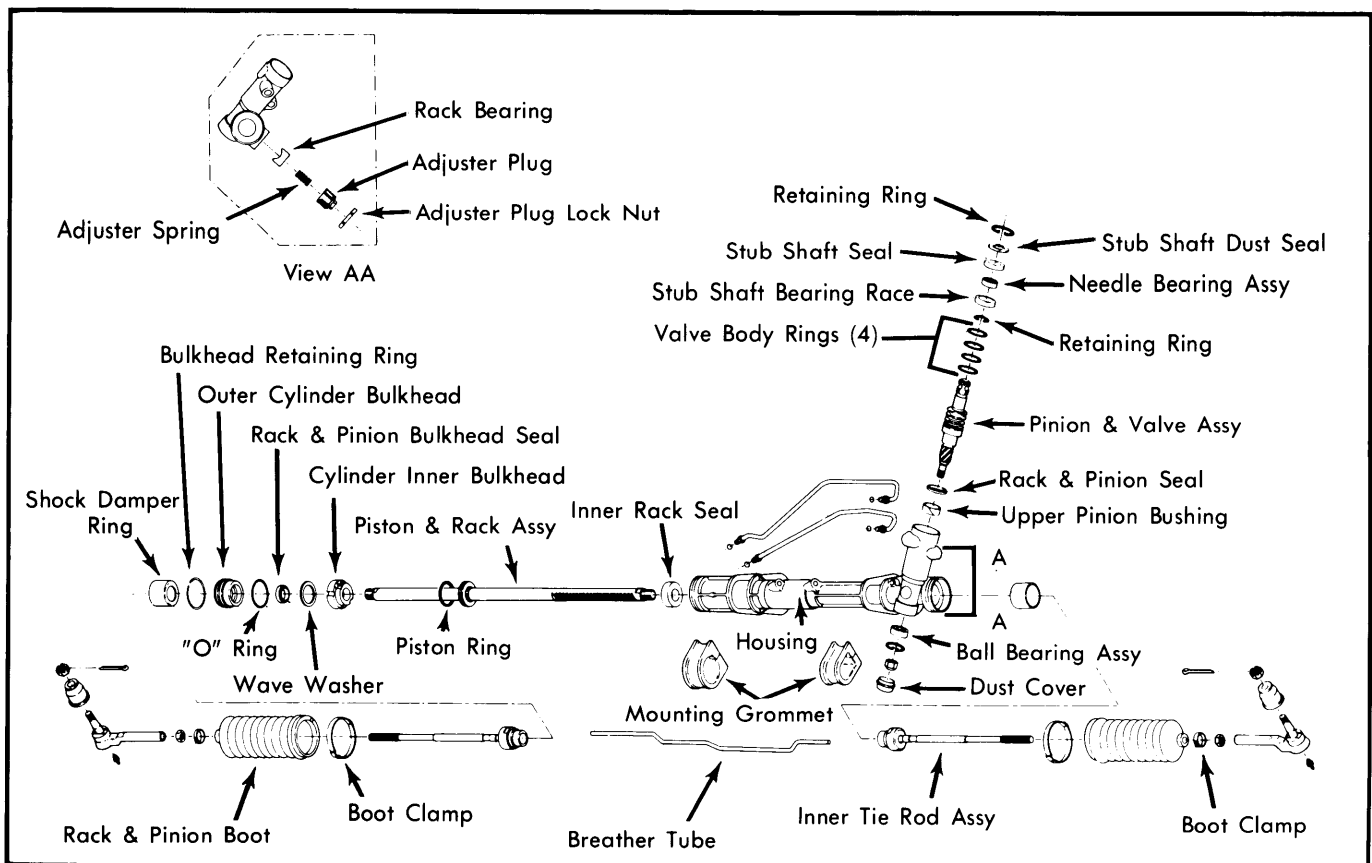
Power Rack and Pinion Steering Assembly (Horizon and Omni Shown, Aries and Reliant Similar)
